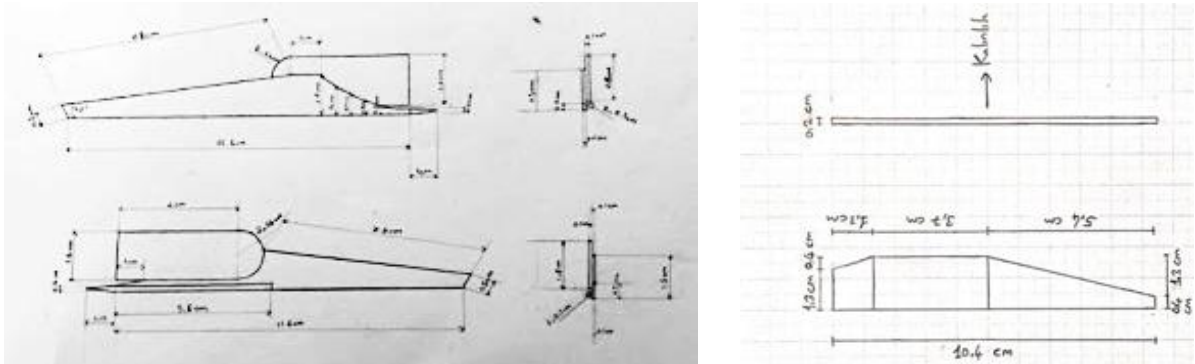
Technical and Nontechnical Examples of Detailed Pencil Drawings
